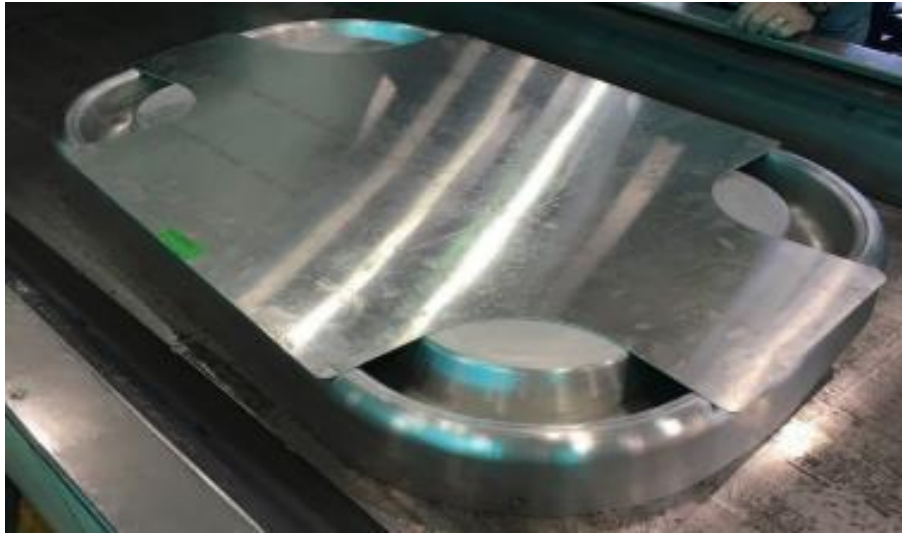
Stage 1 tool and the initial blank positioned in the fluid cell press
